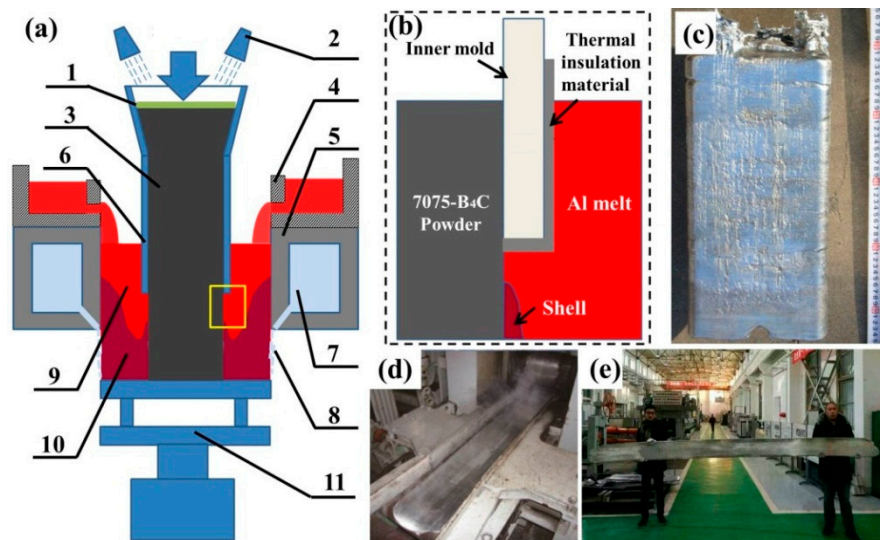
The schematic diagram of (a) the semi-continuous casting equipment, with (1) pressing plate, (2) Ar gas shield, (3) powder mixture, (4) runners, (5) outer mold (crystallizer), (6) inner mold, (7) circulating cooling water, (8) second cooling water, (9) Al melt, (10) Al shell, and (11) drawing drive; (b) a detail of interfacial combination between layers near the inner mold; (c) ingot obtained by continuous casting; (d) the boron carbide-reinforced aluminum layered composite (BRALC) plate with a thickness of 20 mm at the final step during hot rolling; and (e) the thinnest BRALC plate (3 mm) after further rolling.
